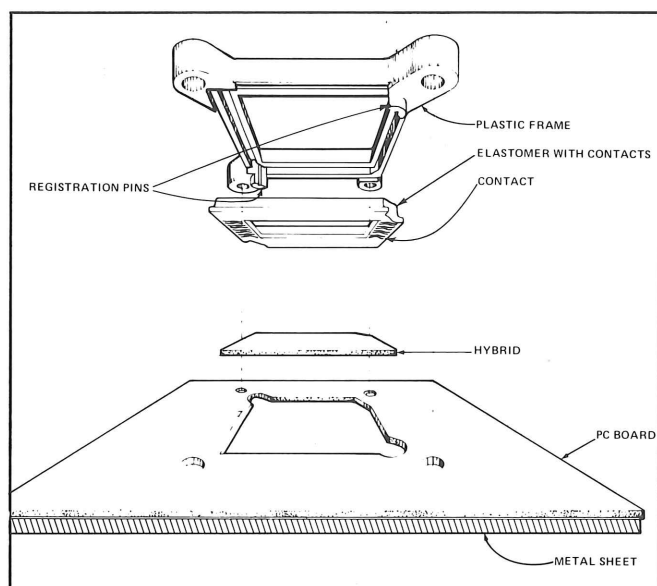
Exploded view of HYPCON connector system in the flat configuration.
